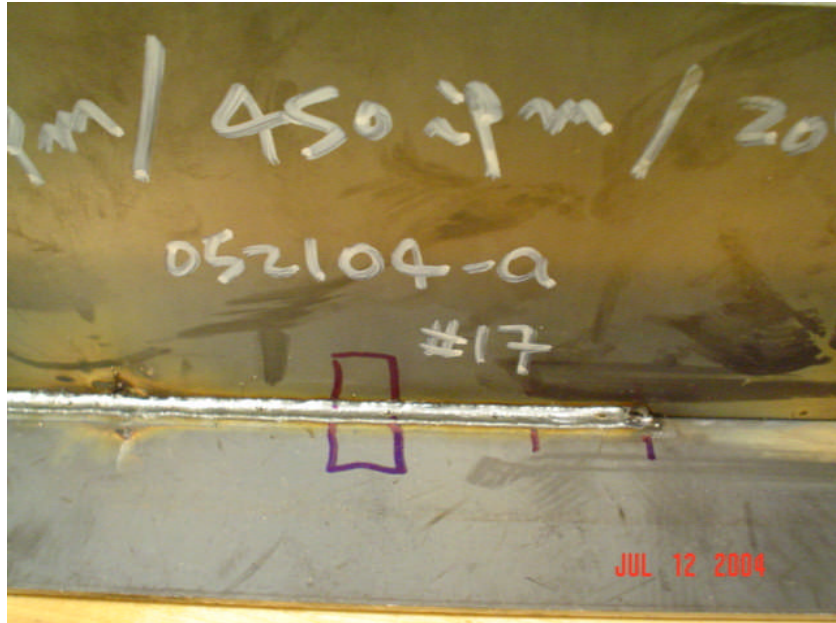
Bead Appearance for a T-Butt Joint made using Single-Spot CO₂ LBW/GMAW-P Hybrid Welding at 3 m/min on 2-mm Sheet
